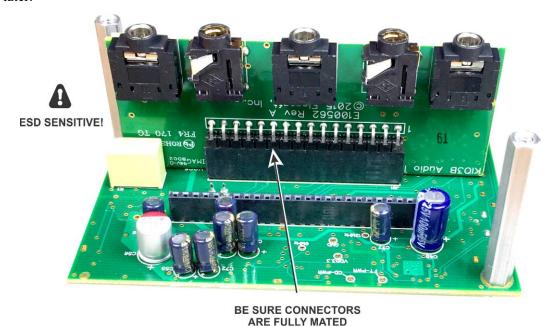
Mounting Audio I/O Daughter Board on KIO3B.
